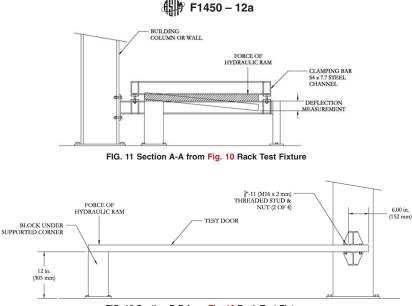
Section B-B from Fig. 10 Rack Test Fixture
